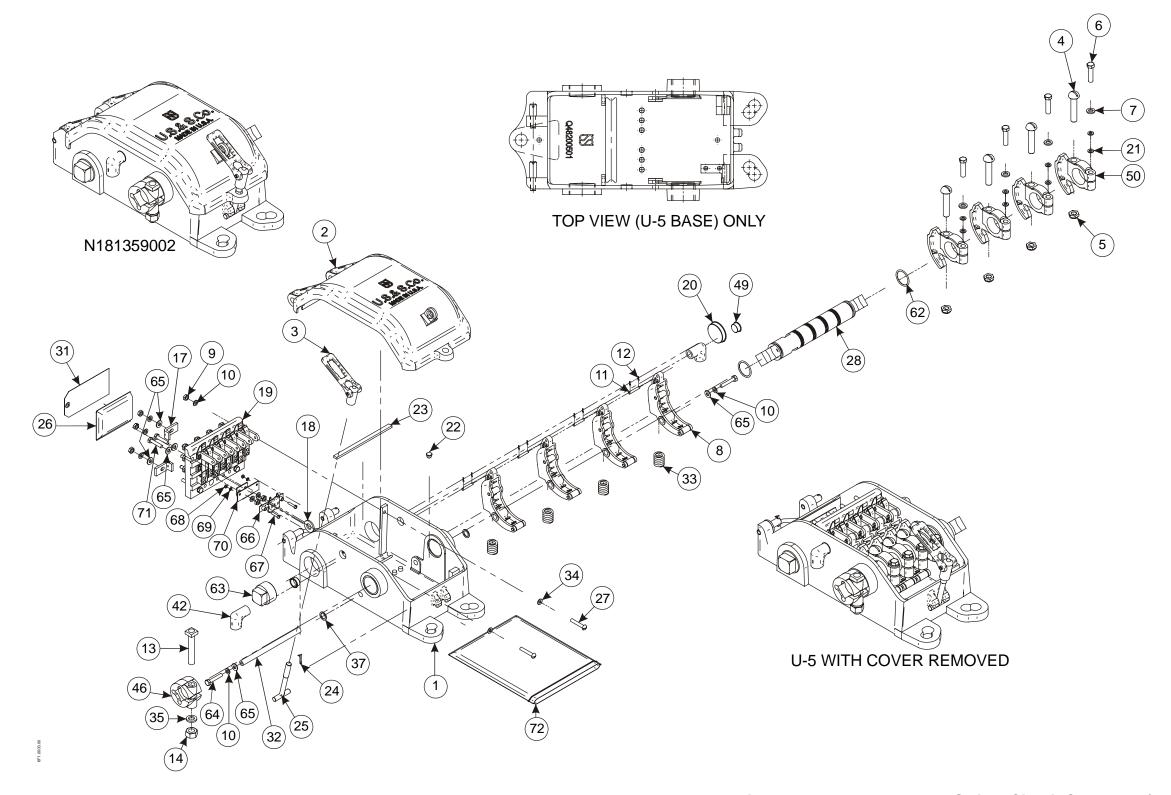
N181359002 U-5 Switch Circuit Controller (Drawing 1576-0023D)
